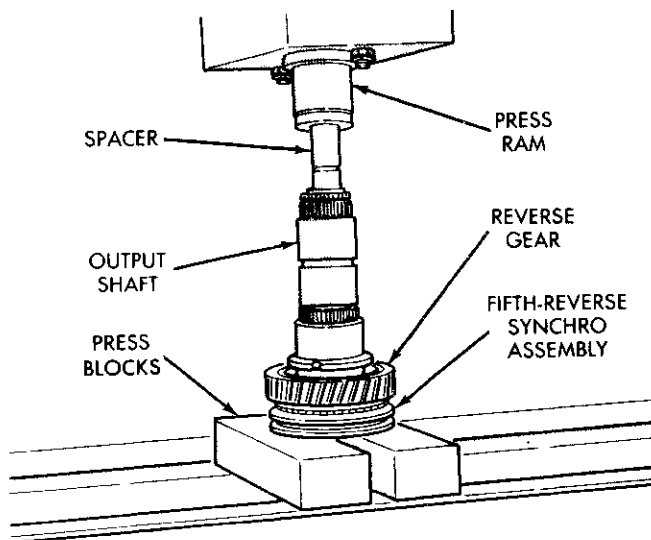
Fifth-Reverse Synchro Assembly Installation
